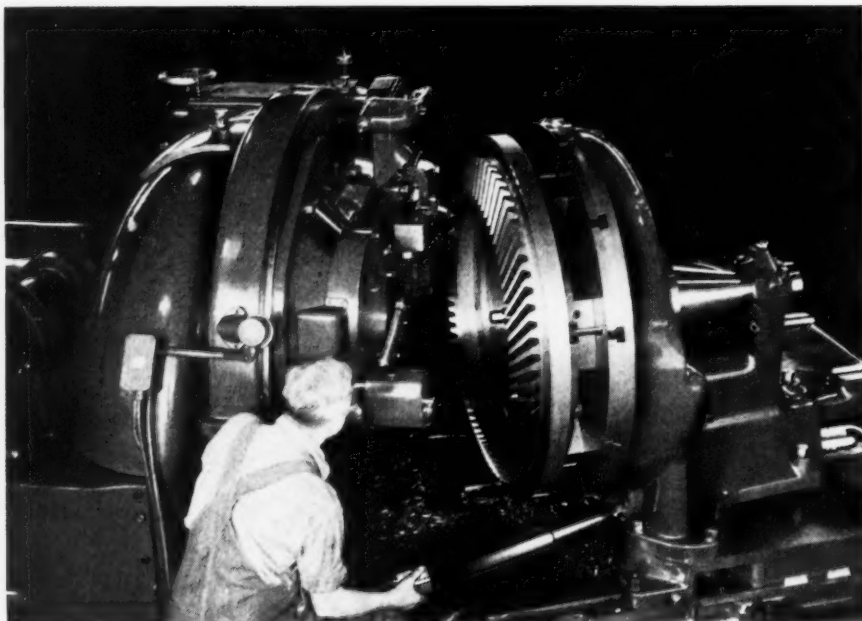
Cutting the Teeth of a Spiral Bevel Gear on a Machine that is Capable of Handling Gears up to 60 Inches in Diameter
